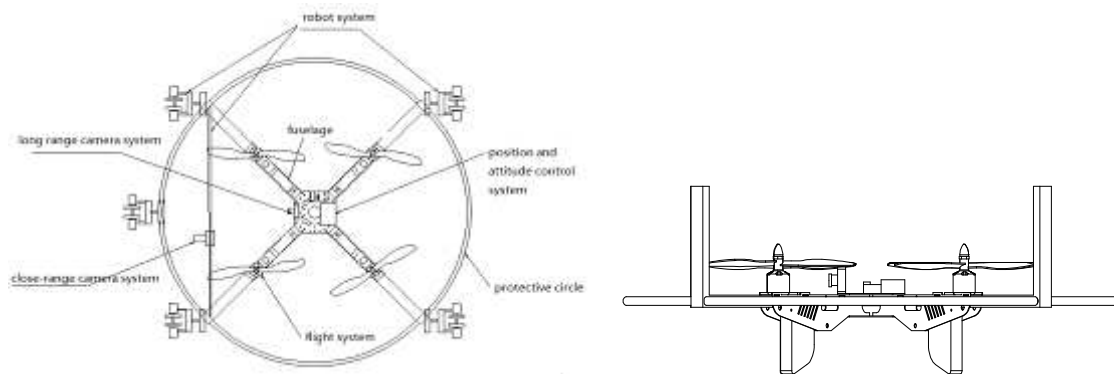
The mechanical top and side view of a quad-rotor UAV with protective accessories.
